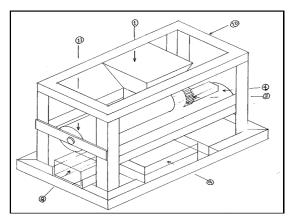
Isometric view of the Fruits Juice Extracting Machine: 1 - Feed hopper, 2 - Slicing blade, 3 – Conveyor shaft, 4 - Juice collector, 5 - Waste collector, 6 - Electric motor, 7 Gear train, 8 -Barrel, 9 - Ball bearing & 10 - Main frame [25].
